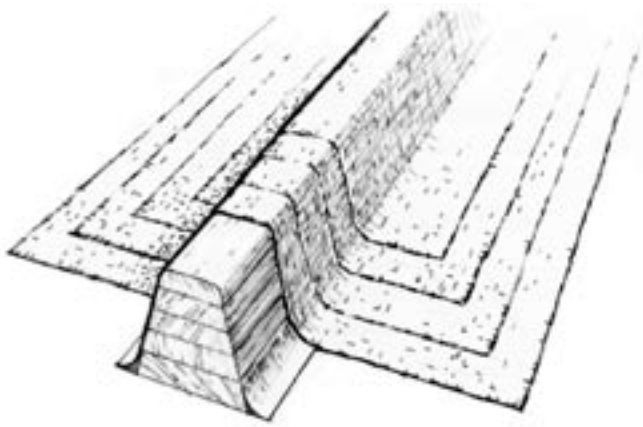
Laminated or solid wooden stringers provide effective panel reinforcement with or without the addition of glass fabric.
